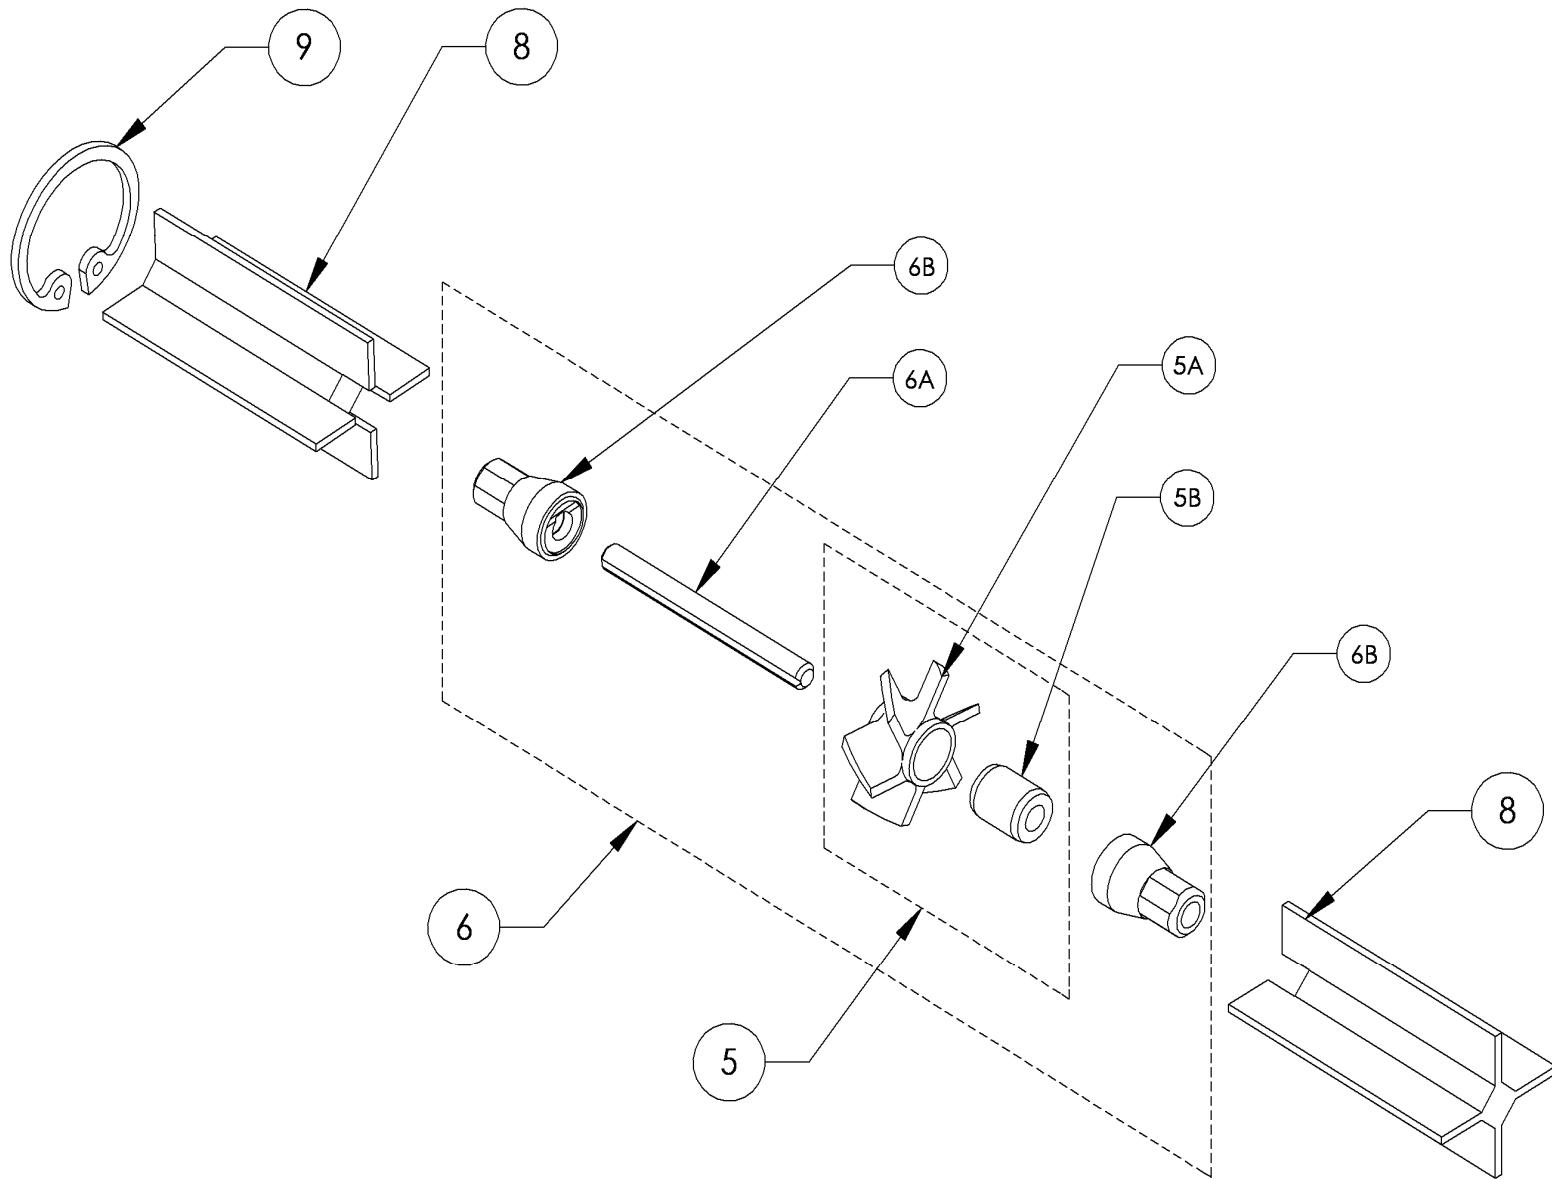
HS4-6 thru HS-24 Journal Bearing Internal Assembly (Bearing Code D)
